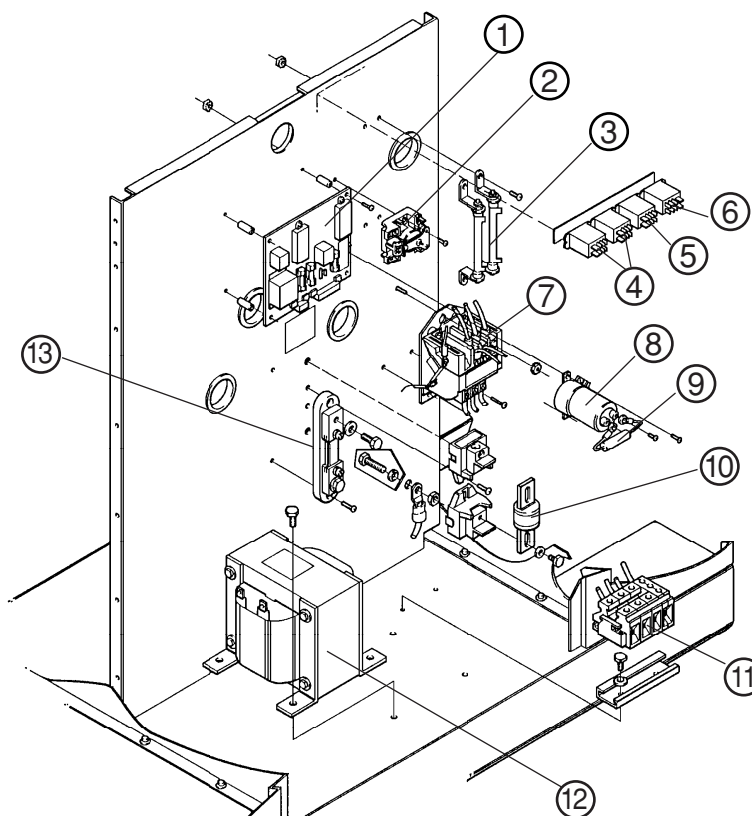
Power Supply – Center Panel and Bottom, Right Side
